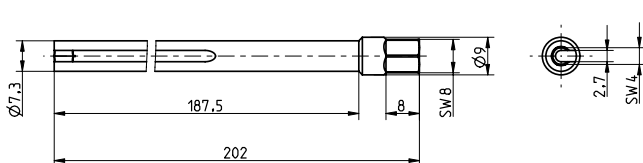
Mounting wrench ø7,3 mm, slotted, Type 1300B14Q01
